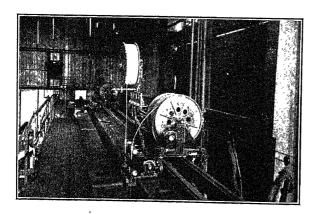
36-Ft. Pipe Welding Machine Showing Two Travel Carriages Each With Two Welding Heads for Automatic Welding of Pipe by Multiple Arc Process
